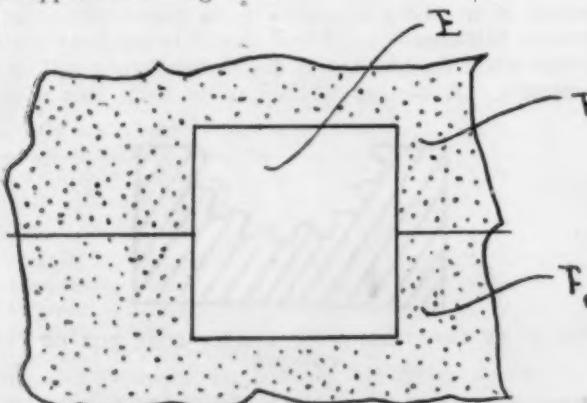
E IS THE PRINT IN WHICH IS SET THE PARTS COMPOSING THE PLASTIC MOLD PROPER; FF₁ IS THE MOLD WHICH ACTS AS A HOLDER FOR THE PLASTIC PARTS
